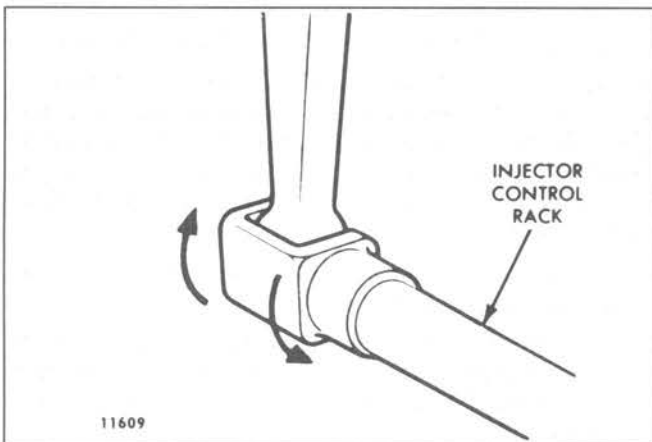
Checking Rotating Movement of Injector Control Rack
